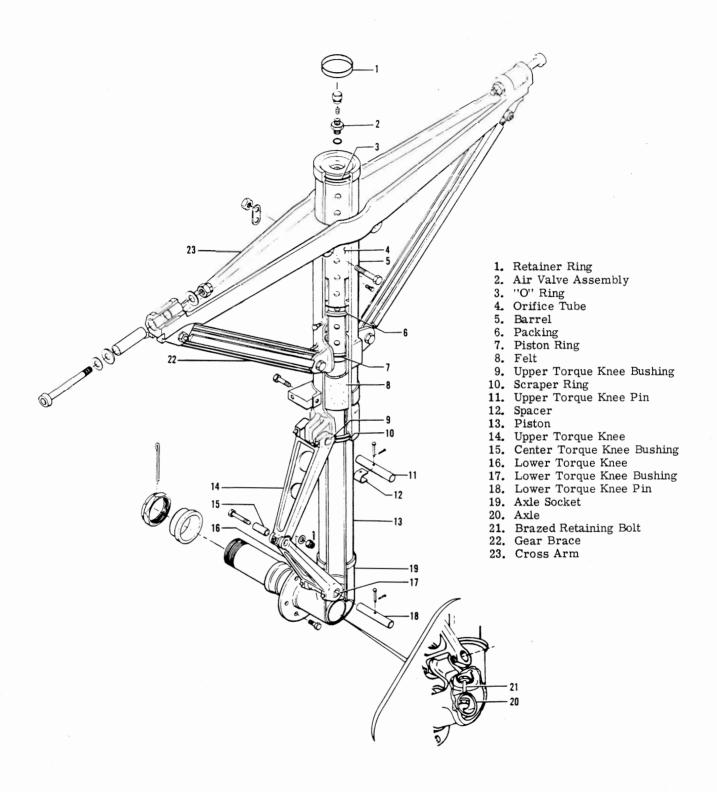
Main Landing Gear Shock Strut Assembly (Airplane Serial TD-524 and after)
